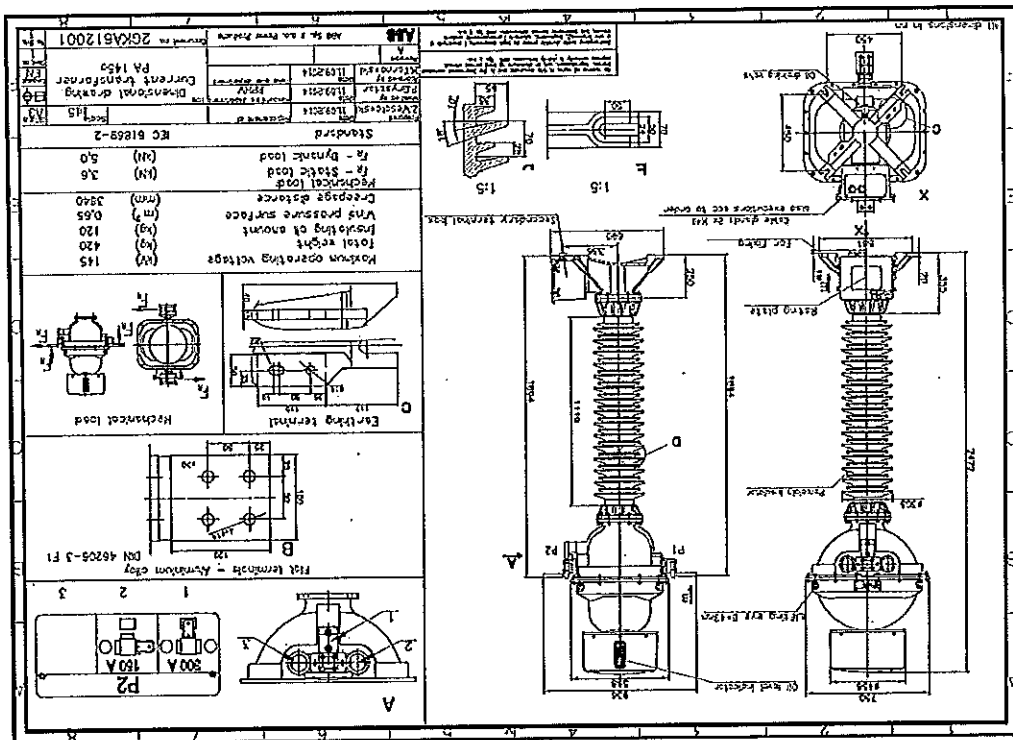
Dimensional drawing of transformer PA145a 150-300A in ser. 87182/14
